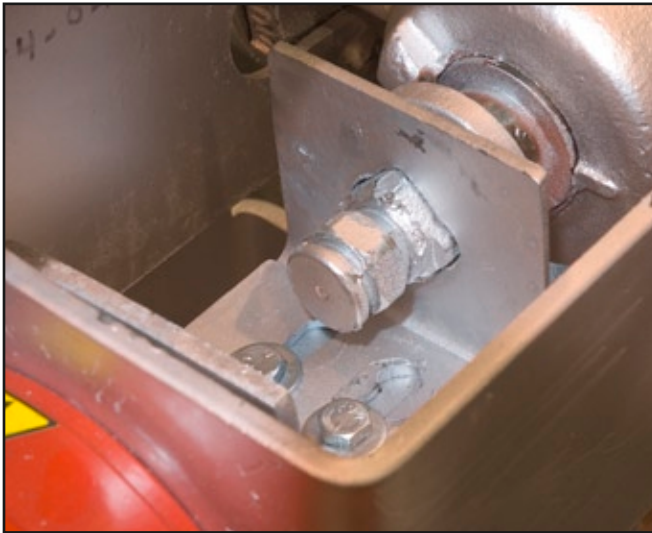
Button-head fitting for lubricant/sealant on thermal fluid inlet valve.
